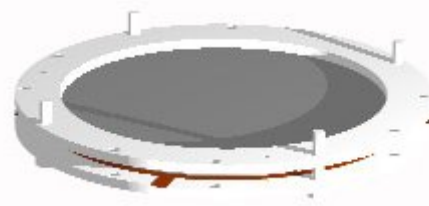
Assembly of MCP-stack - Stage 3-1 (DLD40, DLD80 & HEX80)
